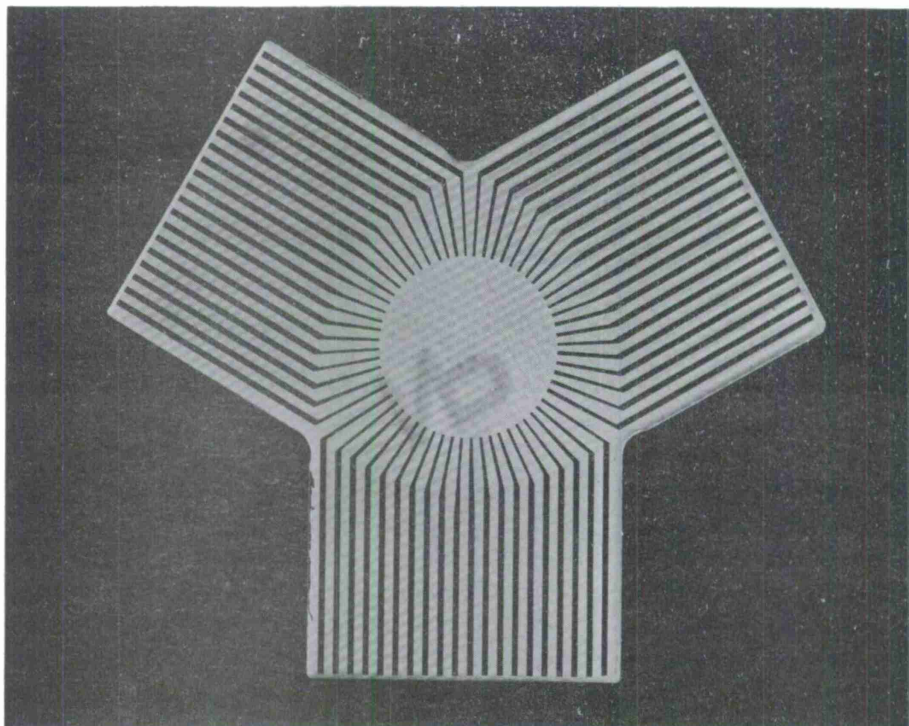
Experimental printed circuit test board for 60-lead package shown in Figure 22.
